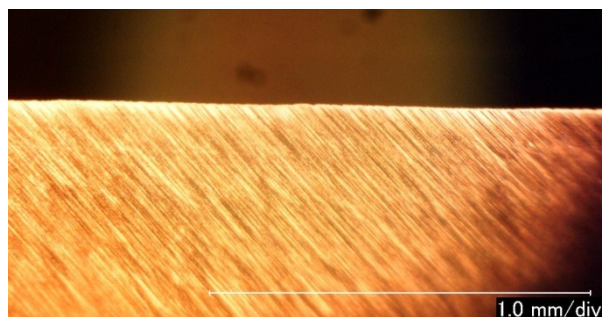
Tool flank wear width of Tool No.2 (Helix angle  $30^\circ$ ) (Down cut method)
